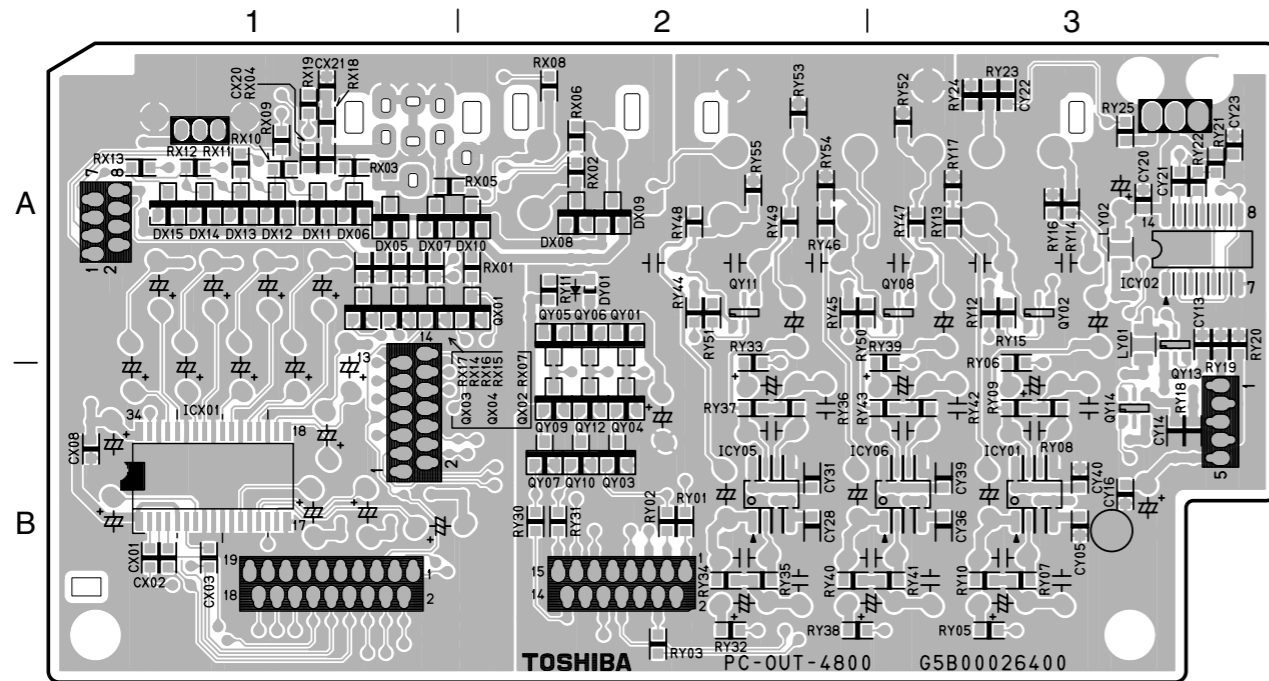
B EU05 Output PC Board (Bottom side)
